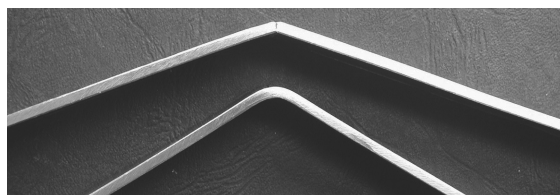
A view of the samples after bend test of the titanium alloy Ti6Al4V butt joints 1.5 mm thick laser welded with the HPDL laser, bending angle 37°-56° (Table 5); a) joint no. 1 (P1), b) joint no. 2 (P2)
